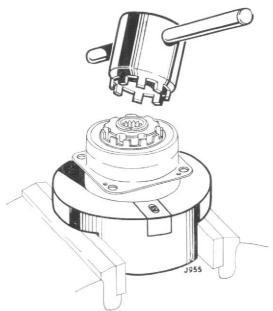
Vice block T.74753 and spanner T.74755, for removing ring nut from lower driving gear assembly.
